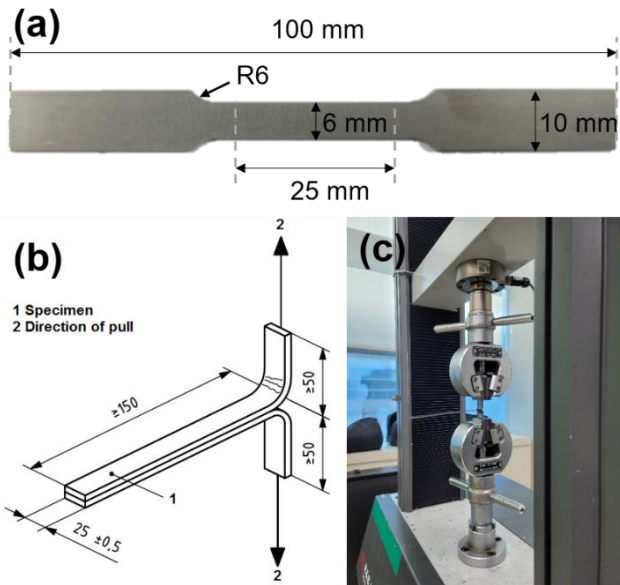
(a) Picture of the ASTM E8 sub-size specimen used for uniaxial tensile test. (b) Schematic diagram of the ISO 11339 specimen used for the peel test adopted in this study. (c) The appearance of the peel test specimen installed in the universal tensile tester.
